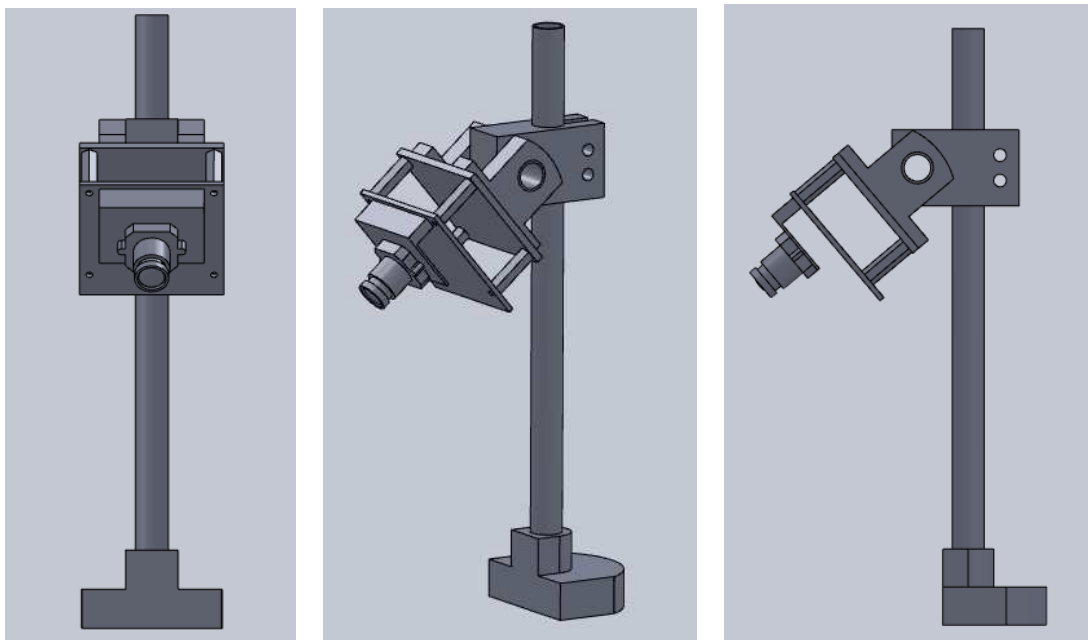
Design of Image Sensor Mounting in SolidWorks
